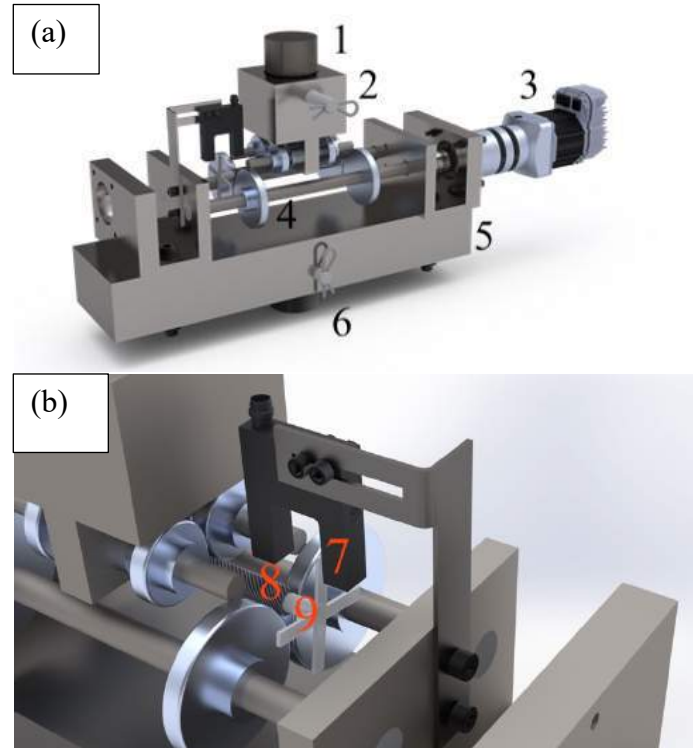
(a) CAD rendering of flexural test fixture. 1. top post, 2. head, 3. motor, 4. roller, 5. base, 6. bottom post. (b) Close up CAD rendering of fork sensor. 7. fork sensor, 8. sample, 9. propeller
